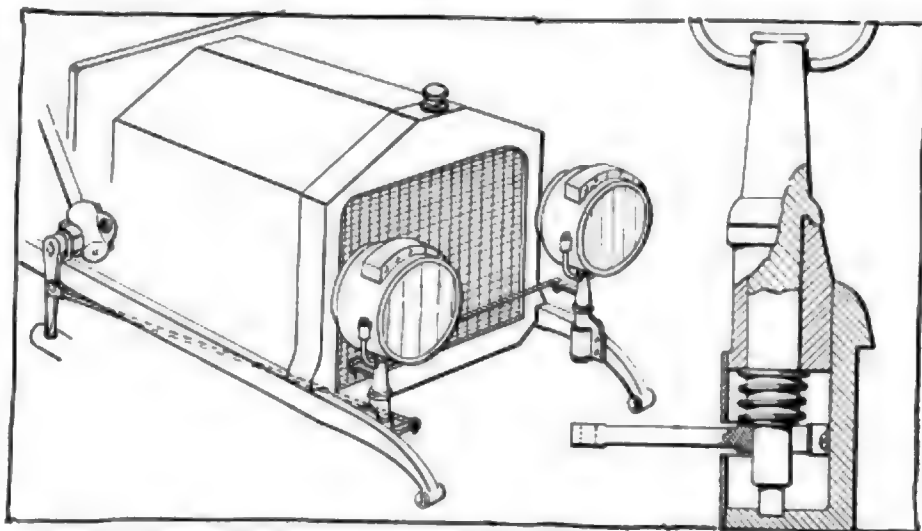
PETER'S HEADLIGHT TURNER WITH SECTION OF PIVOT CUT AWAY
